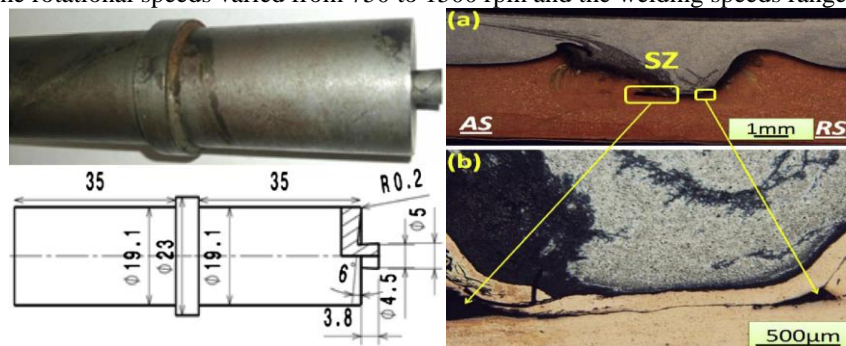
The FSW tool used for all the welding processes.(a) Macrostructure and (b) some channel defects on the sheets interfaces in specimen.
